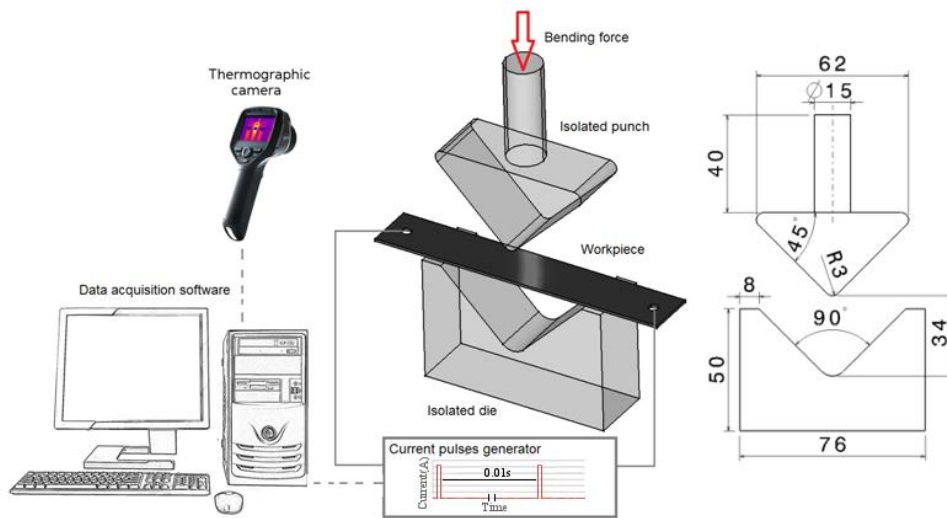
Bottom bending process schematic diagram and engineering drawing.
